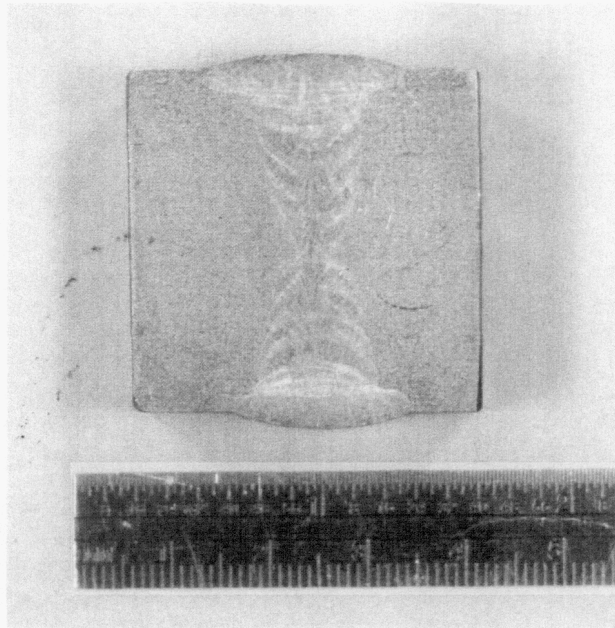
Macrograph of a GTAW welded Alloy 22 plate
